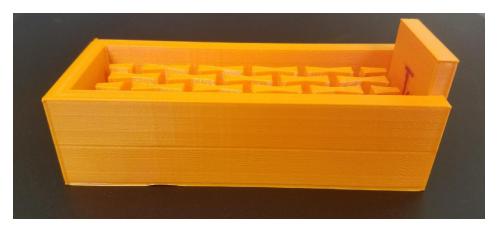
3-D printed side view model 1 Side view of a 3D printed mold of the Re-entrant Masters-Evans model 1
